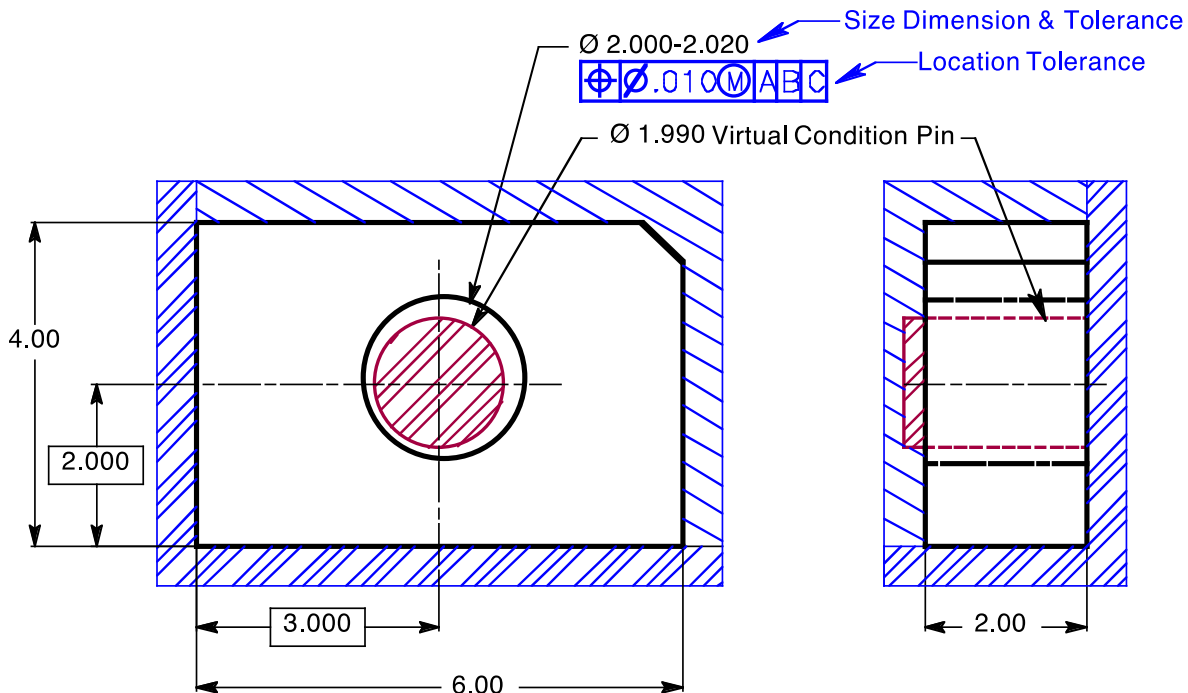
Inspection of a feature of size with a position tolerance at MMC using a functional gage.
